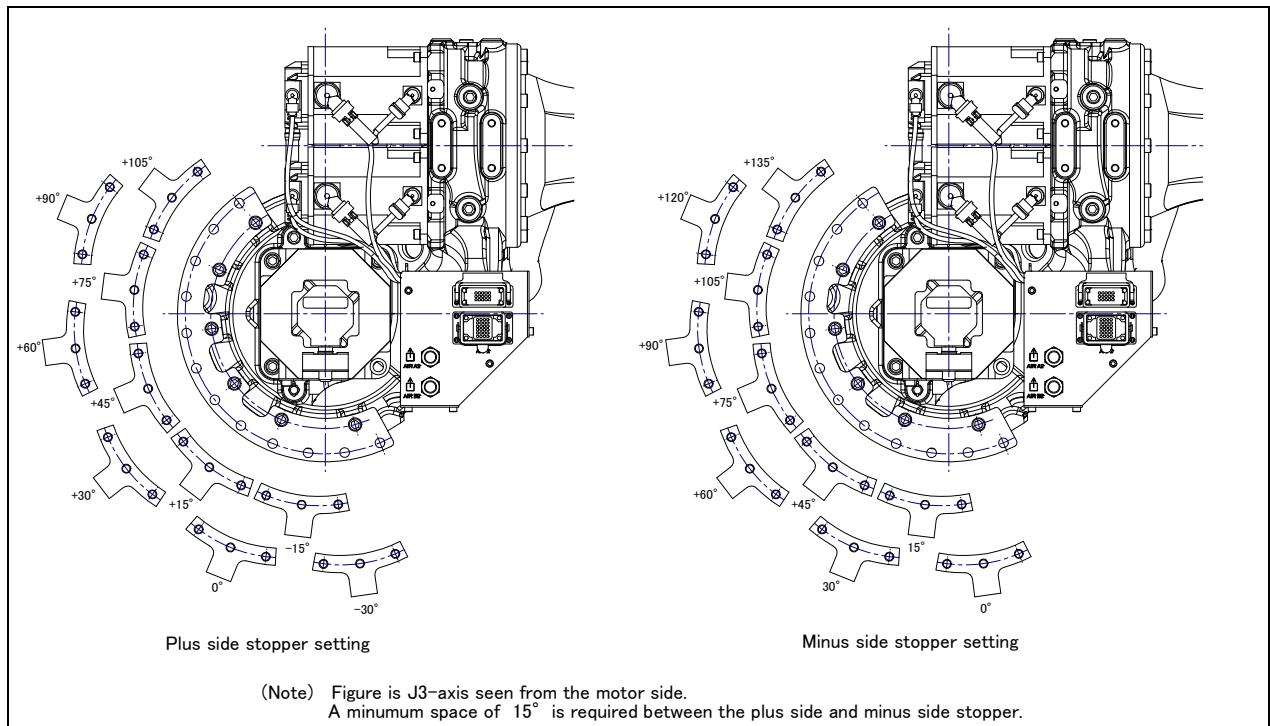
(s) Mounting the J3-axis adjustable mechanical stopper (3/3)
